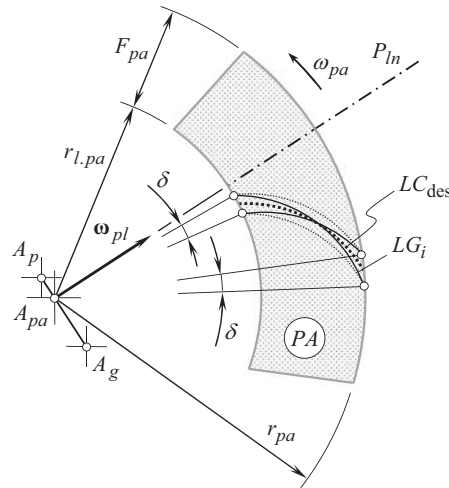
Kinematics of a method of inspection gears for crossed-axes gear pair.
